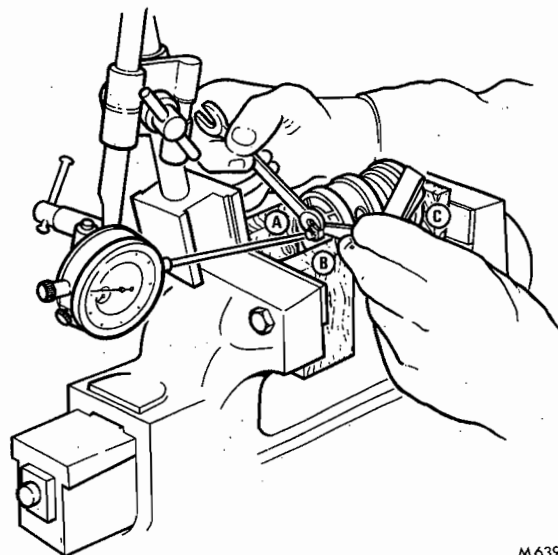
ADJUSTING INLET/EXHAUST VALVE CLEARANCE
